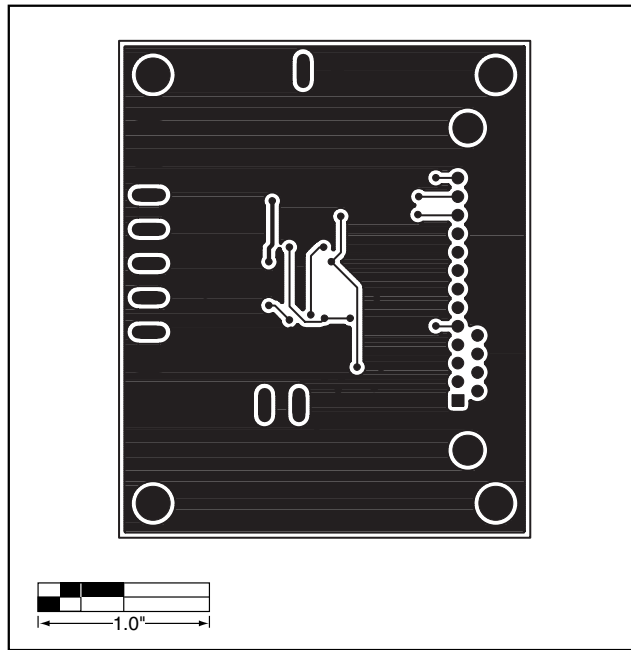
MAX1036 EV Kit PC Board Layout—Solder Side
